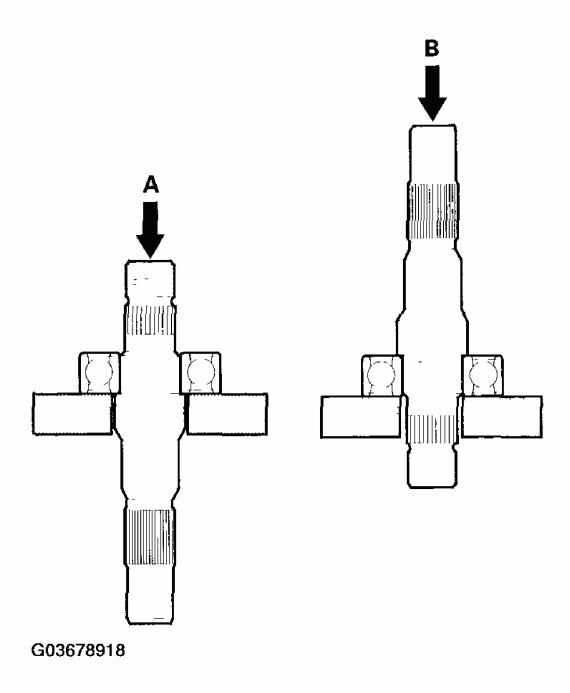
Removing And Installing Ball Bearing Courtesy of AMERICAN HONDA MOTOR CO., INC.
